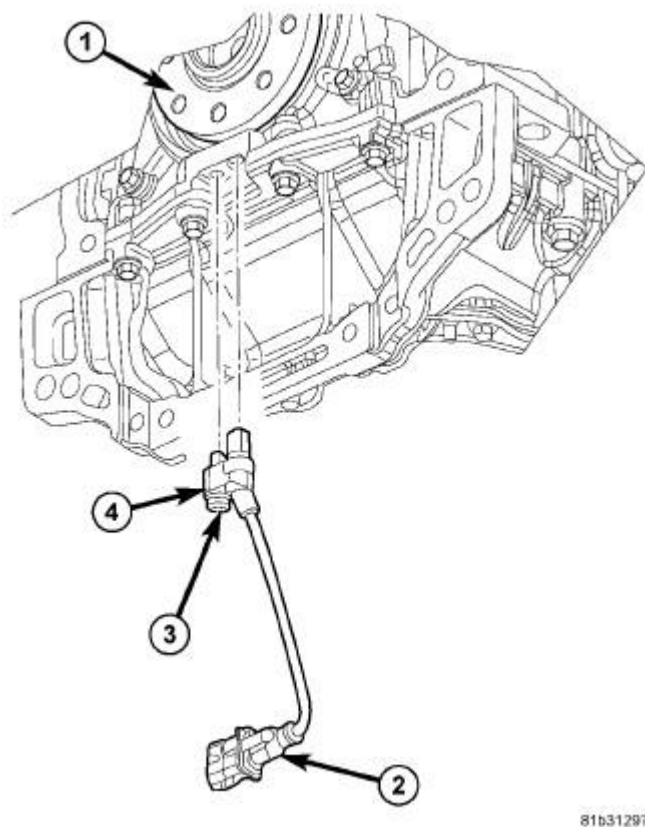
Crankshaft Hub, Electrical Connector, Mounting Bolt & CKP Sensor
